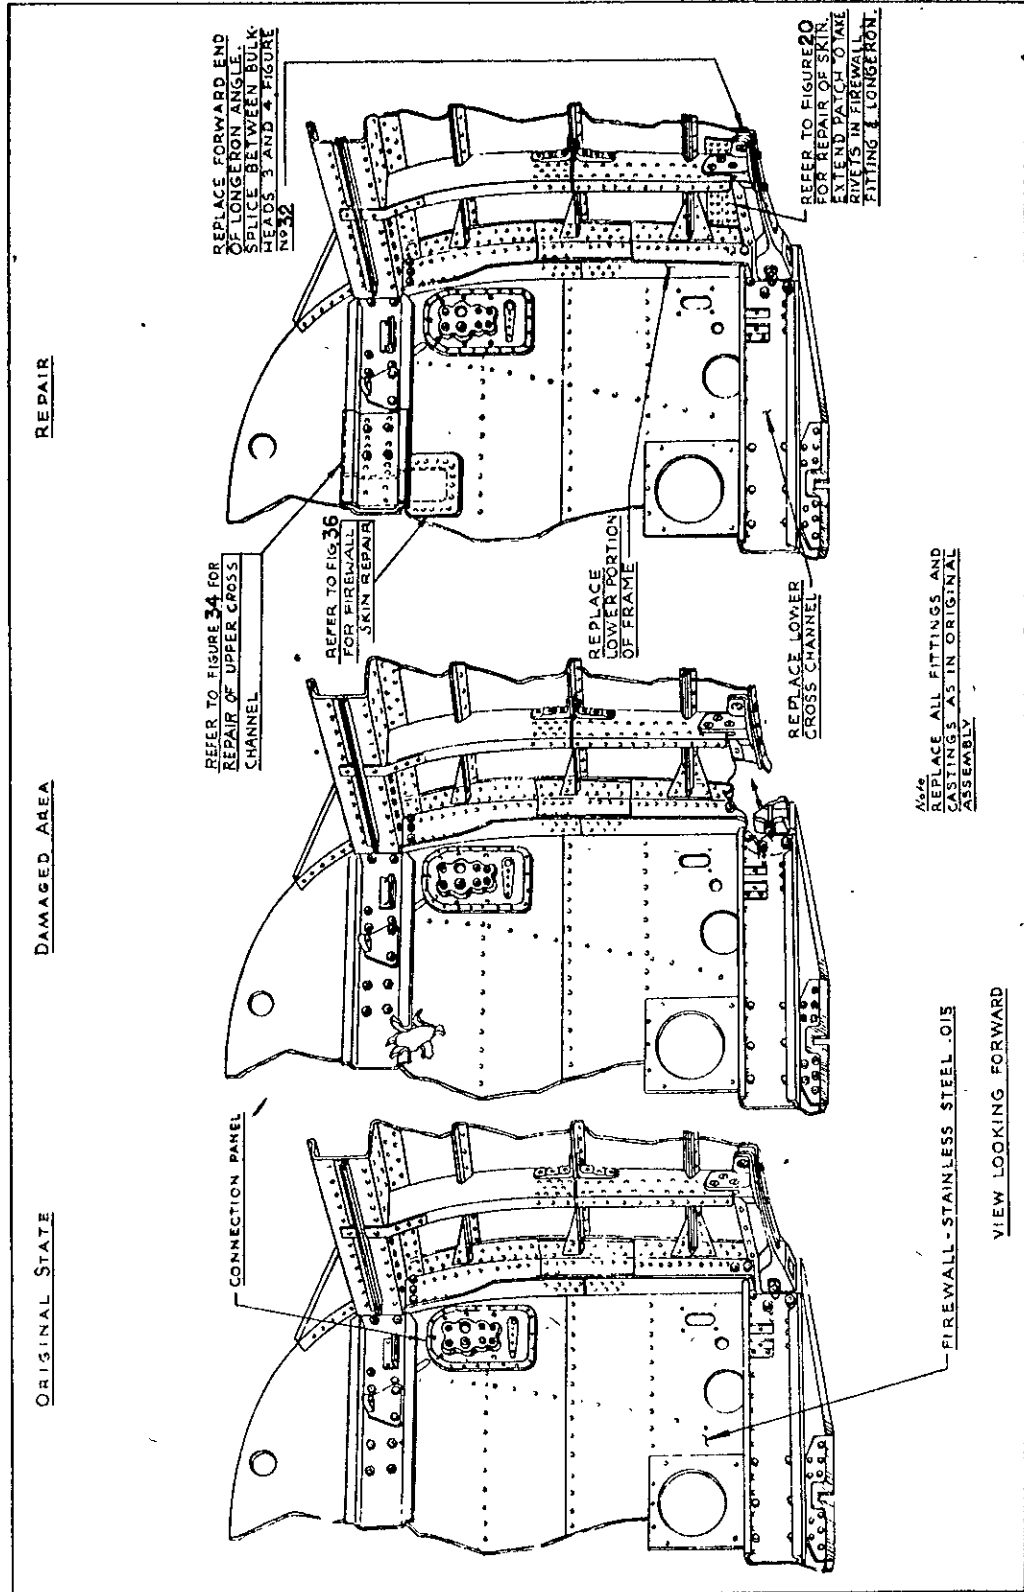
Fuselage - Skin and Fire Wall Damage Sta No. 1
